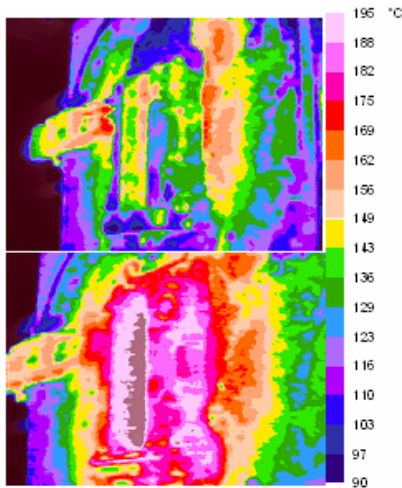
Working process. Thermographs. The fixed part of the die-casting die: working surface and casting (above), working surface without casting (below).
